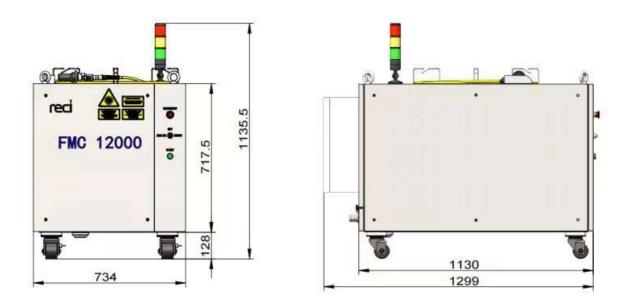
Front view and Side view of FMC12000 (unit: mm)
